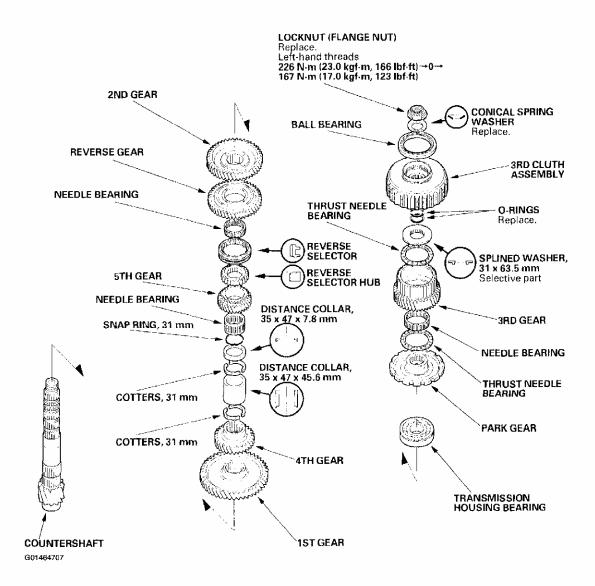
Exploded View Of Countershaft Assembly Courtesy of AMERICAN HONDA MOTOR CO., INC.
